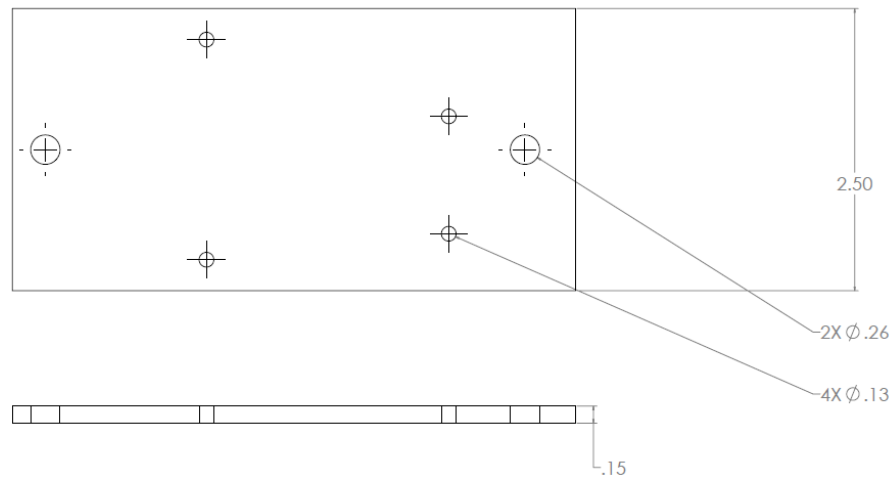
Mount to support the Arduino Uno board and the CNC shield (units: inch)
